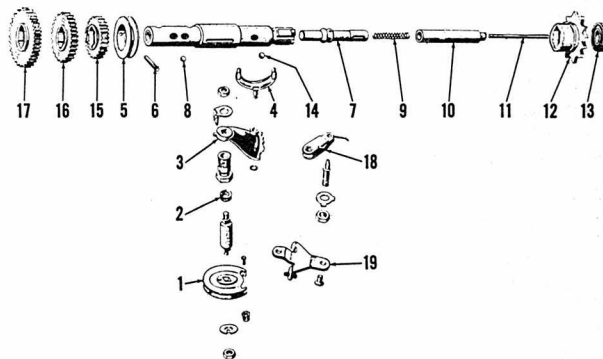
Exploded view of three speed transmission output shaft and gears.
